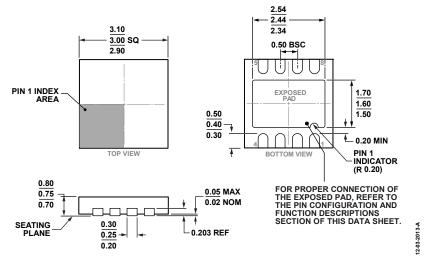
8-Lead Lead Frame Chip Scale Package [LFCSP] 3 mm × 3 mm Body and 0.75 mm Package Height (CP-8-21) Dimensions shown in millimeters
